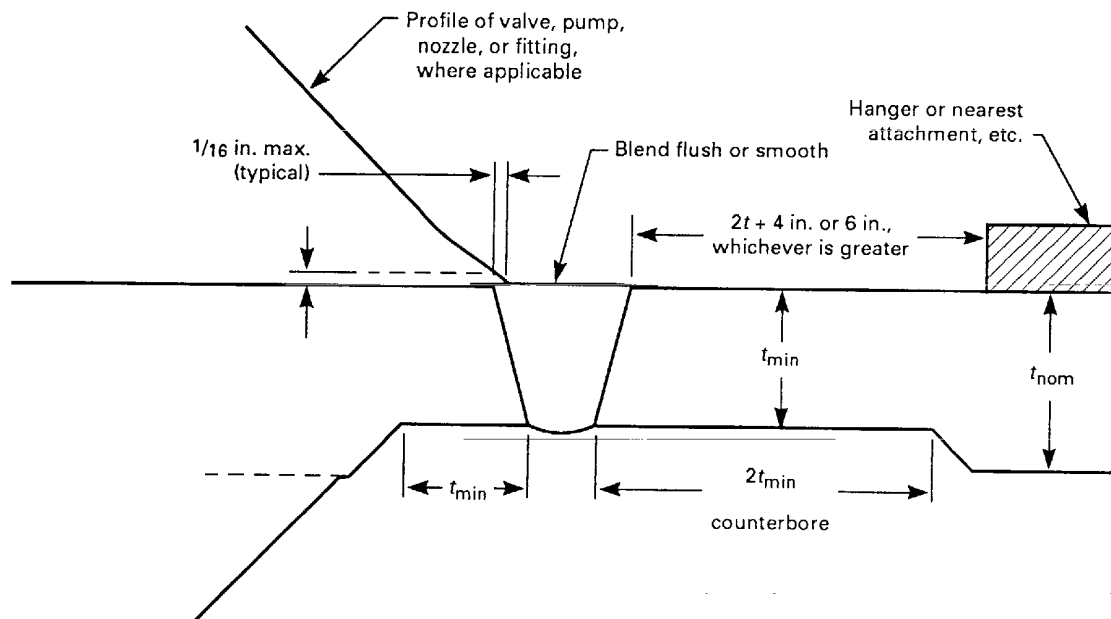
COMPONENT TO PIPE WELD
